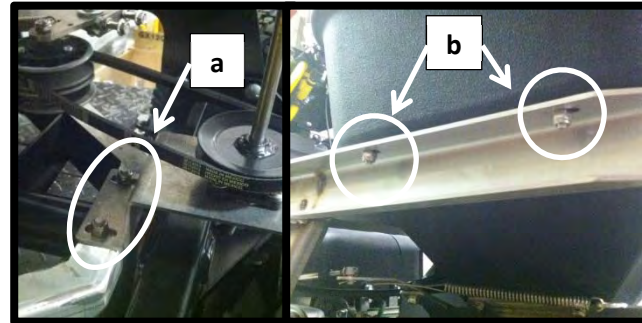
a) Slotted holes for belt pulley adjustment, b) slotted holes for hopper adjustment
